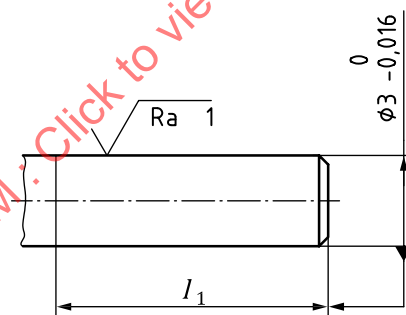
Dimensions, tolerances and surface roughness for Type 4 shank
